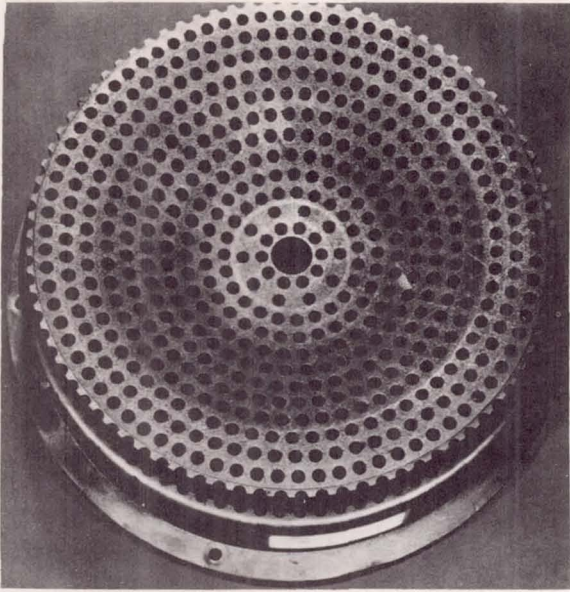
18-Inch injector. Electric-discharge machining. (Courtesy Rocketdyne.)
